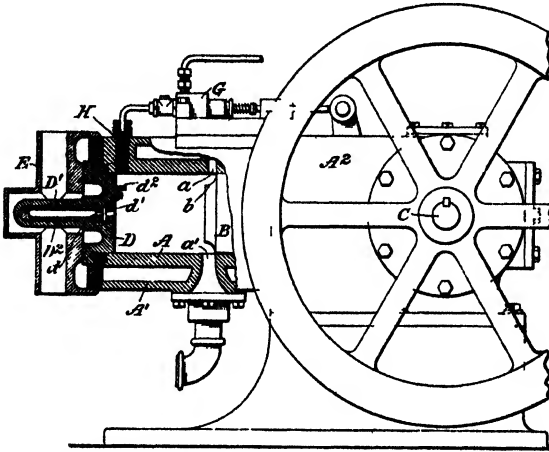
Carl W Weiss introduced the hot-tube engine in 1893
